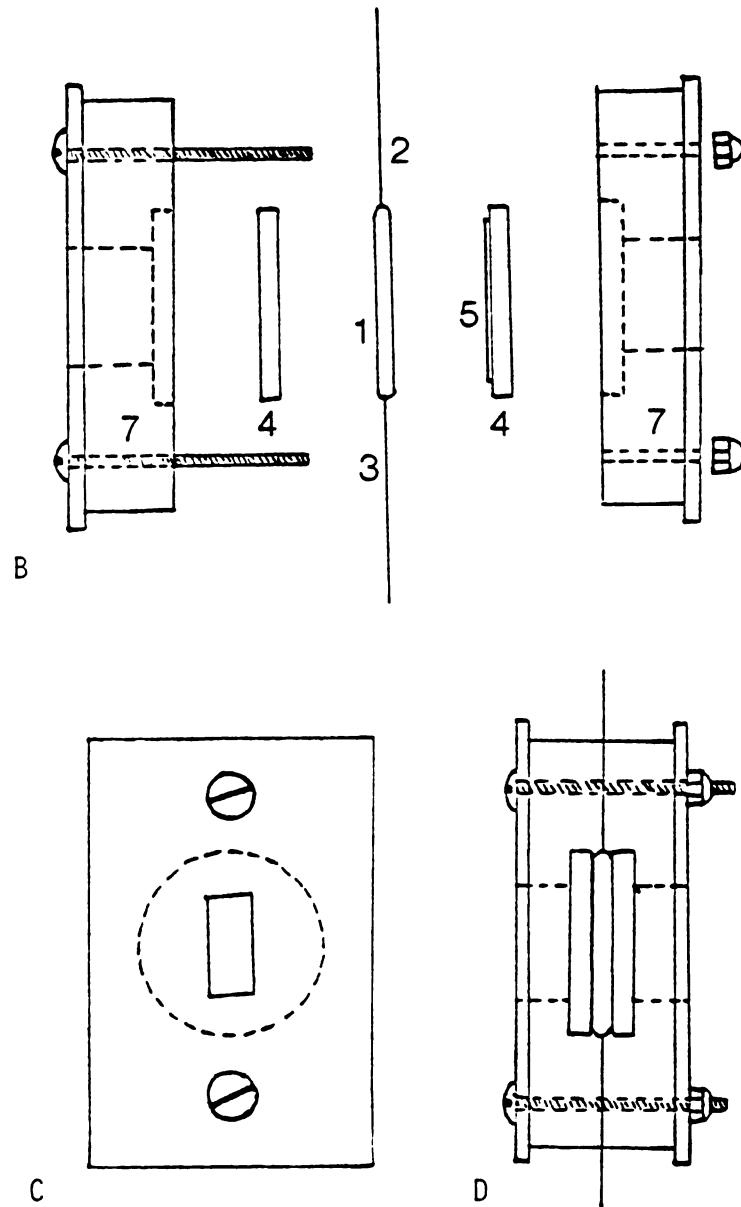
(cont'd). B. Exploded view of cell and holder.
